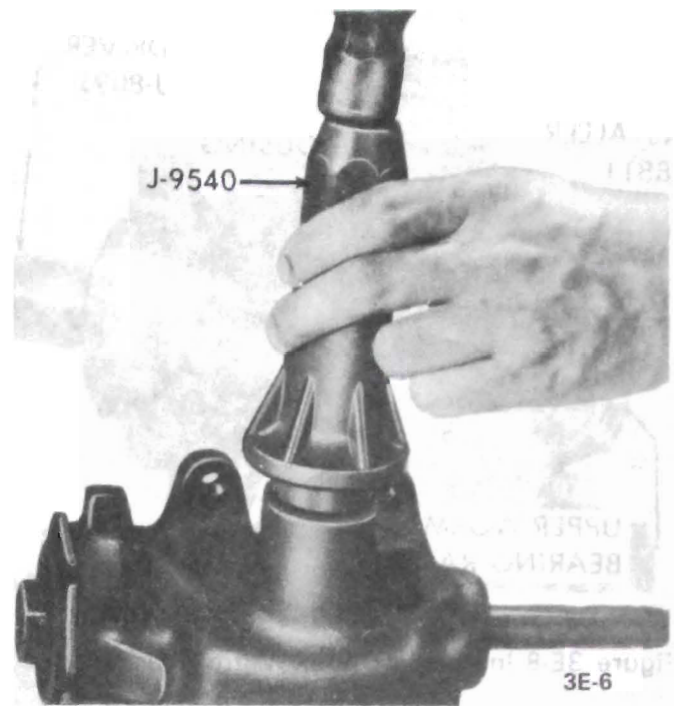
E-6 Installing Pitman Shaft Seal - Shaft Installed
